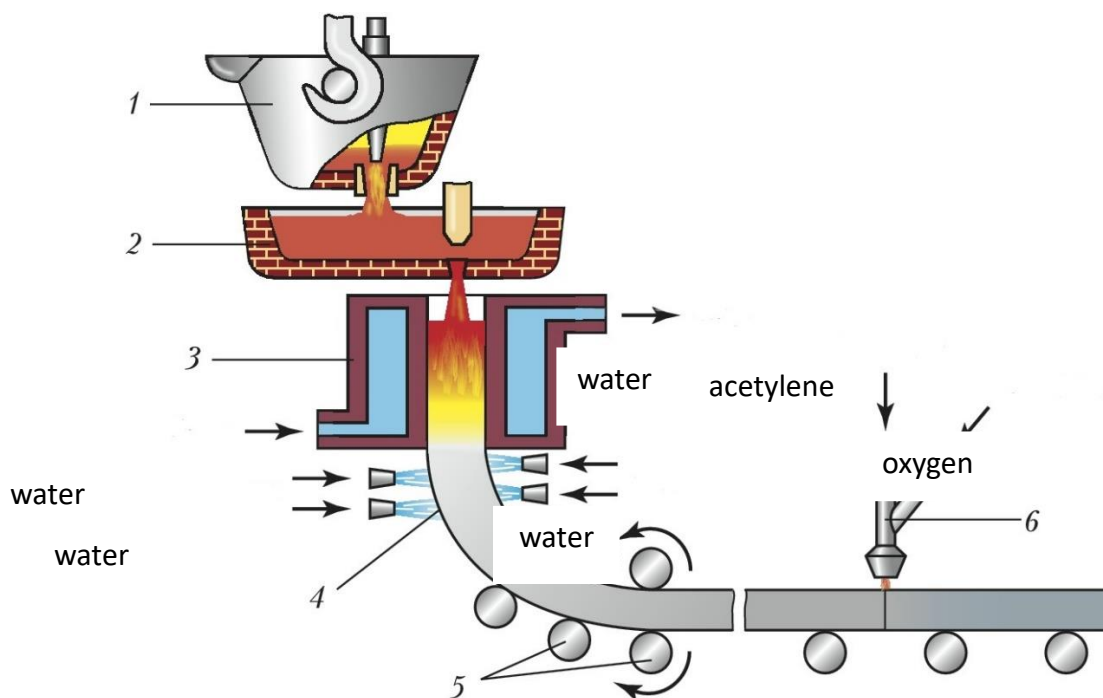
Continuous steel casting: 1-Liquid steel coil; 2- Intermediate coil; 3-Crystallizer (crystallizer); 4-Second cooling zone and support system of flow rollers; 5-Tensioner-rectifier unit; 6-Cutting hump.
